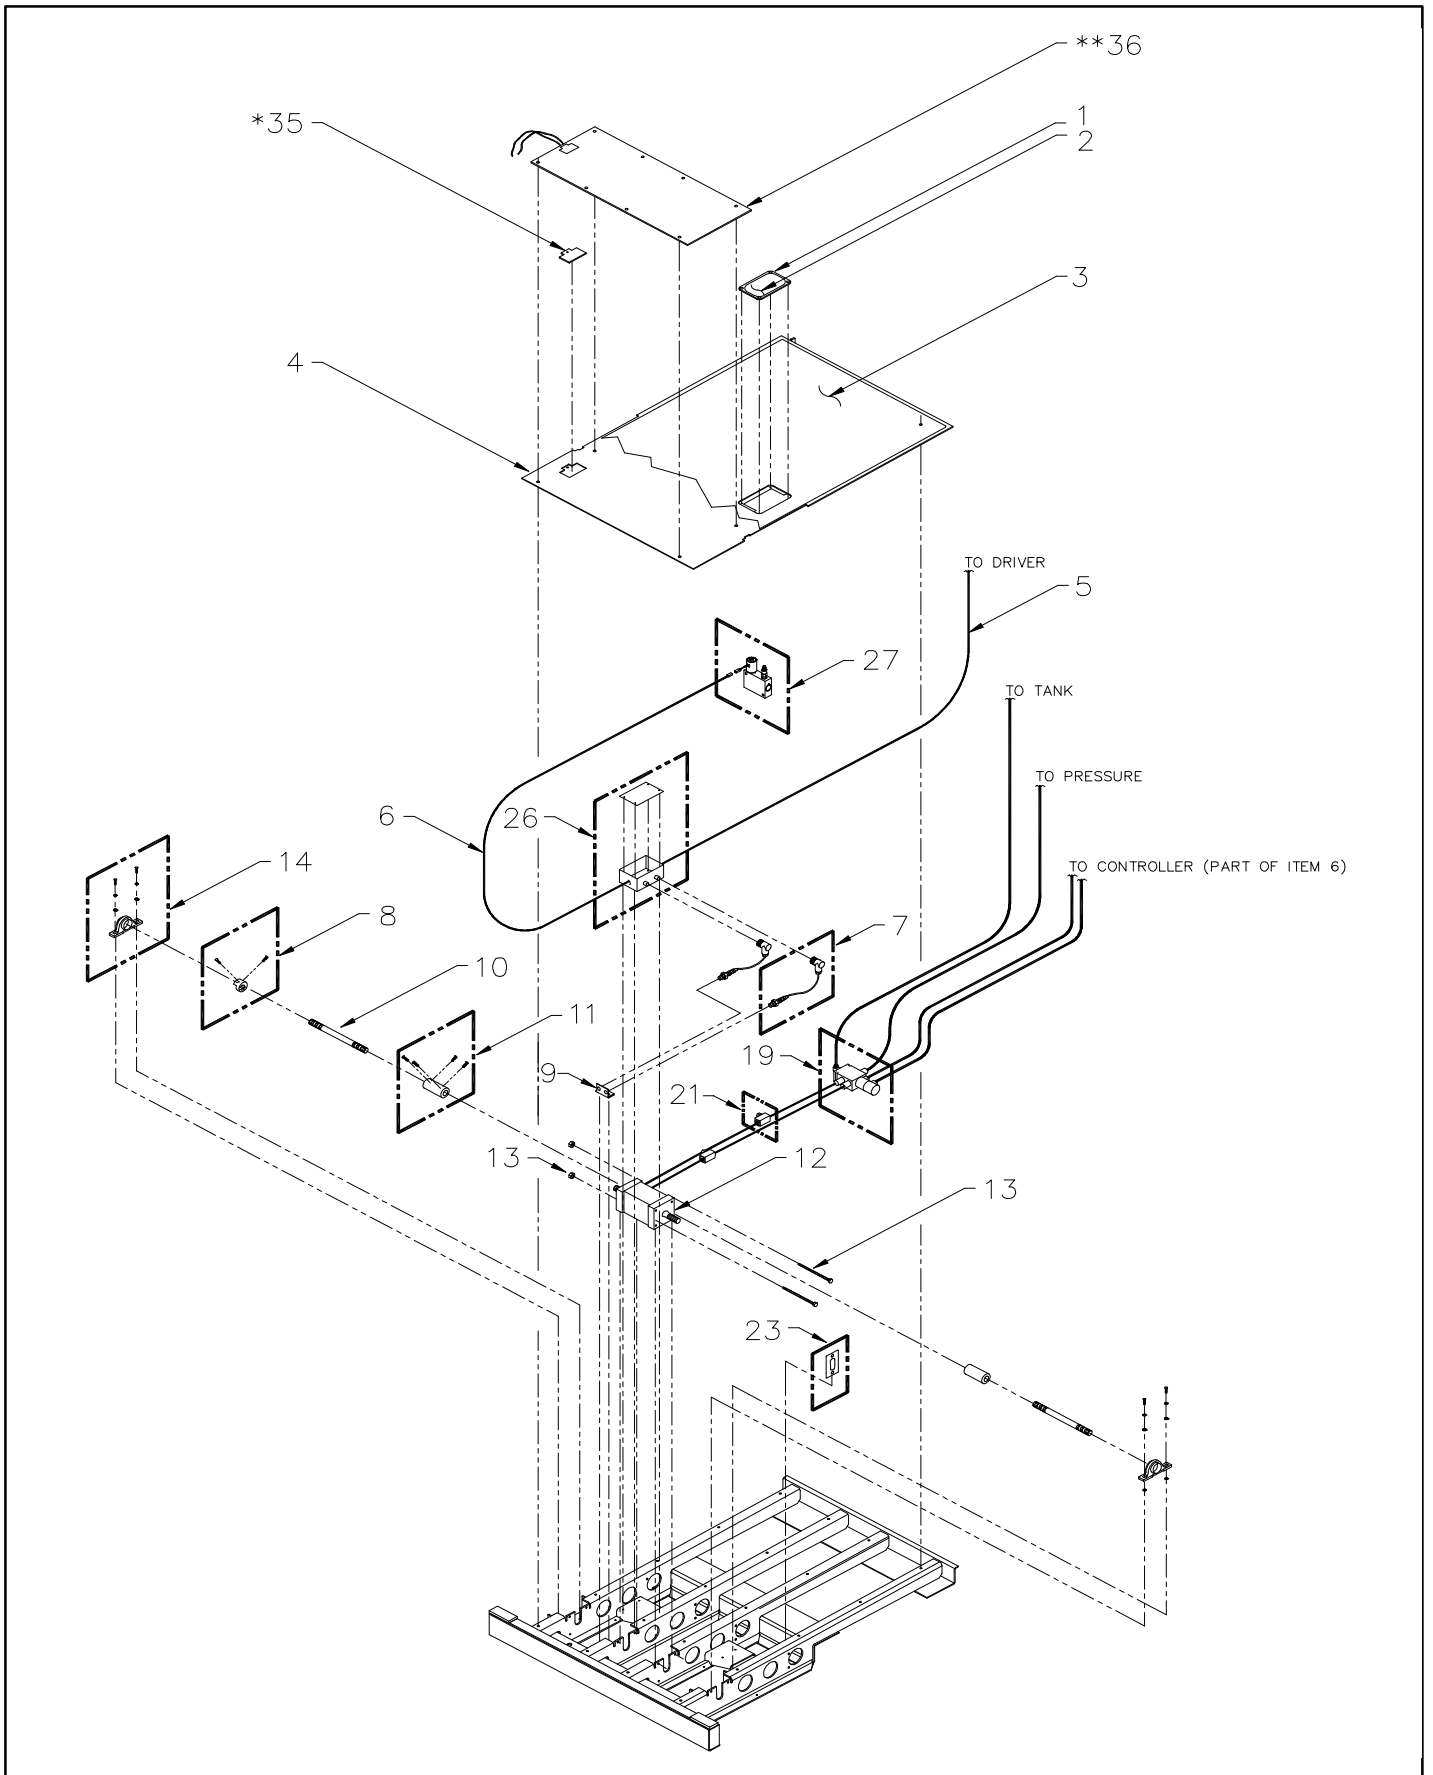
A: ELECTRICAL AND HYDRAULIC ASSEMBLY
